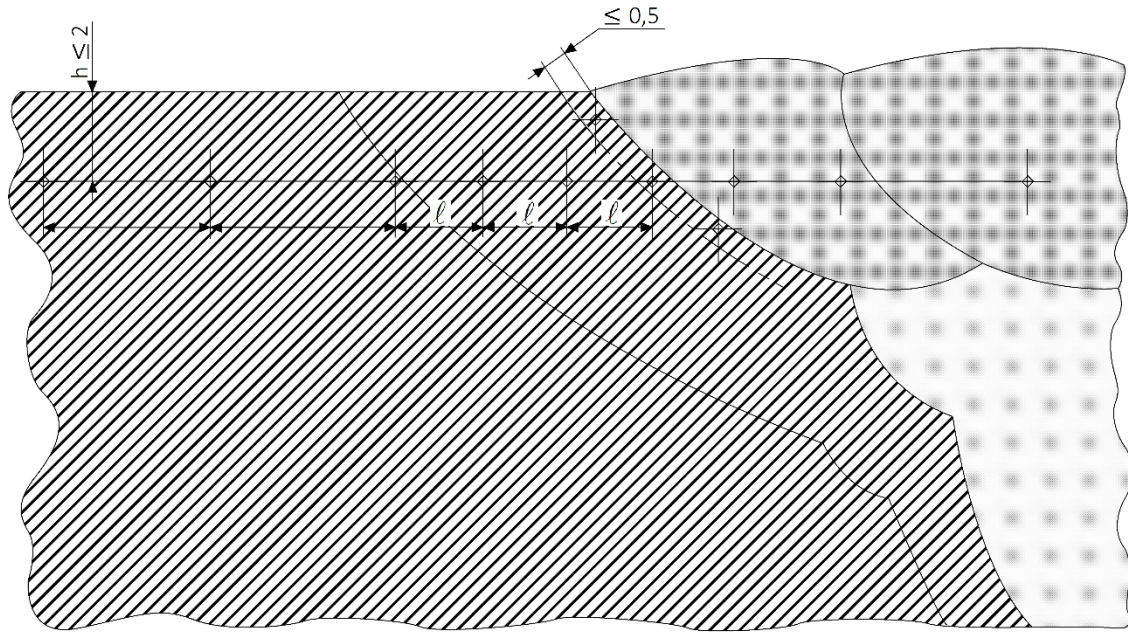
Example of hardness indentations in butt weld
